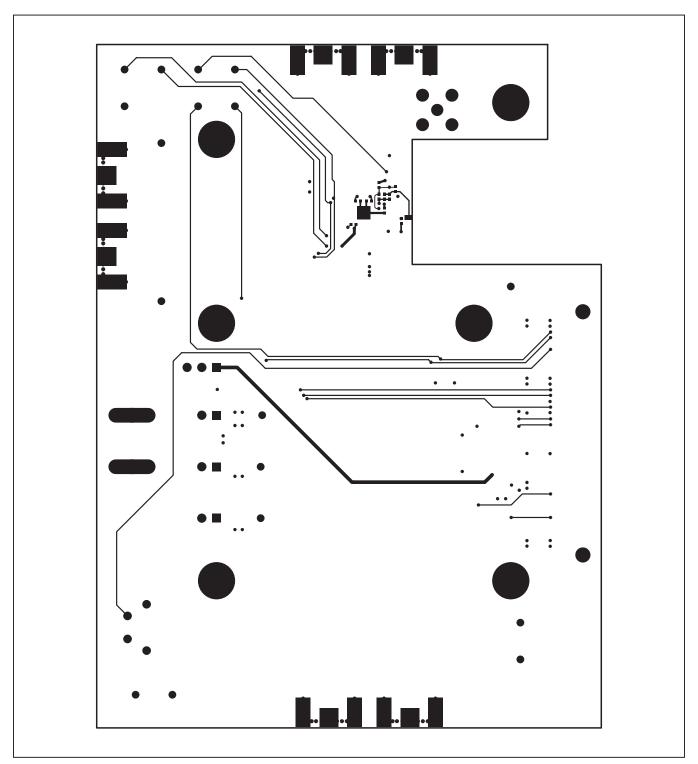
MAX3711 EV Kit PCB Layout—Solder Side
